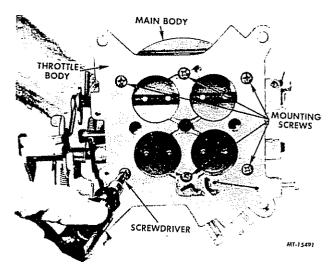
INSTALLING AND TORQUING THROTTLE BODY SCREWS
